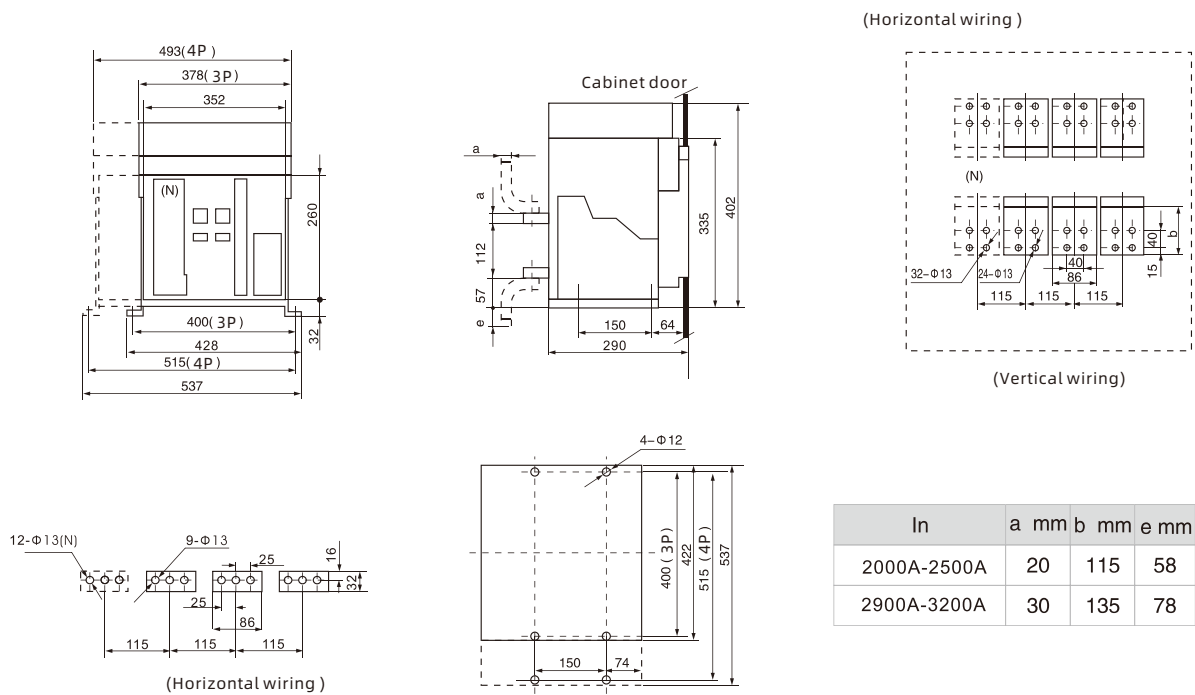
Fixed circuit breaker overall and installation dimensions (ARW1-3200, 3200/4)
